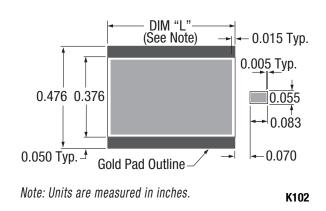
12 mm (HP) Coaxial Resonator Footpad Dimensions
